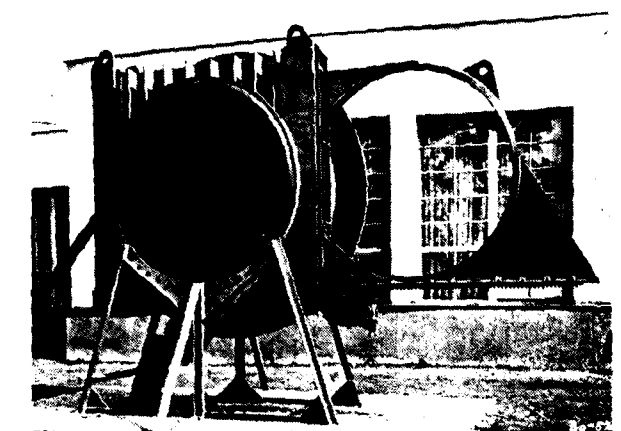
Self-supporting Welded Spectacle Plate with a Diaphragm Expansion.
